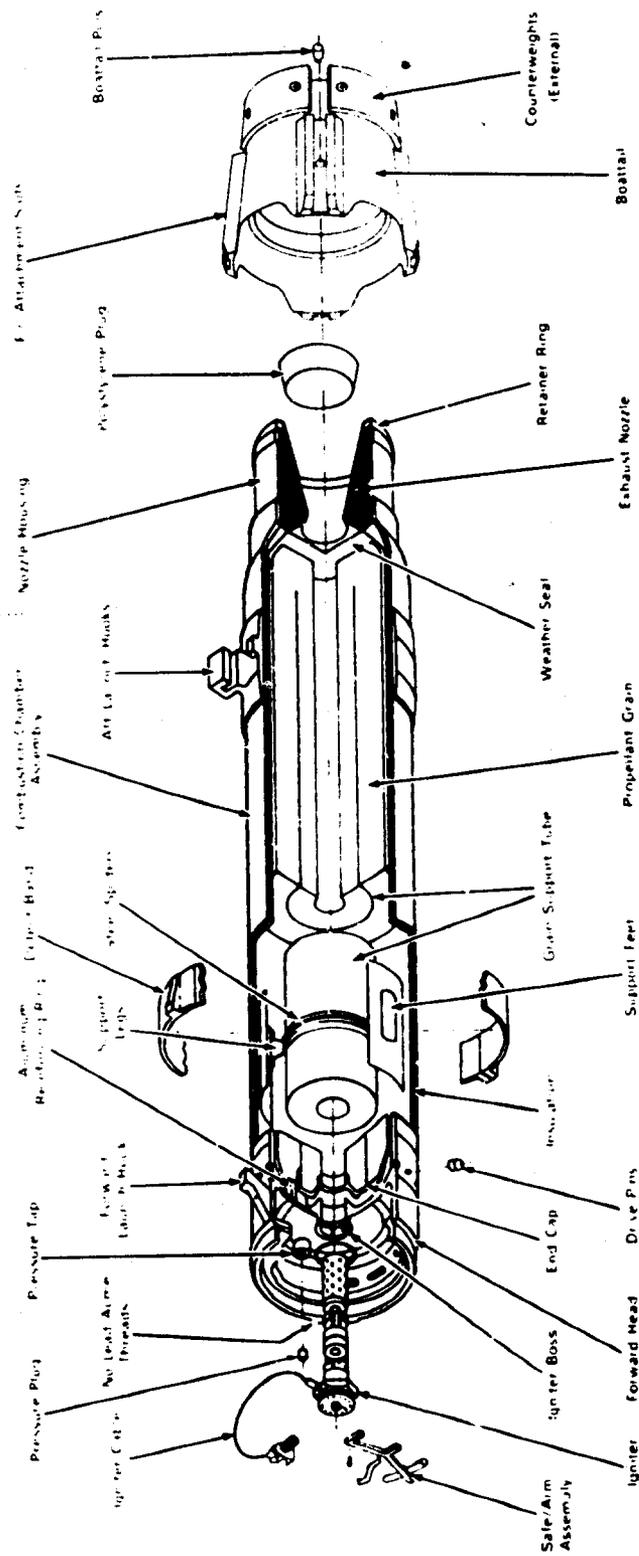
Rocket Motor Section Mk 39 Mods 0, 1, 2, 3 and 5. Exploded View.
